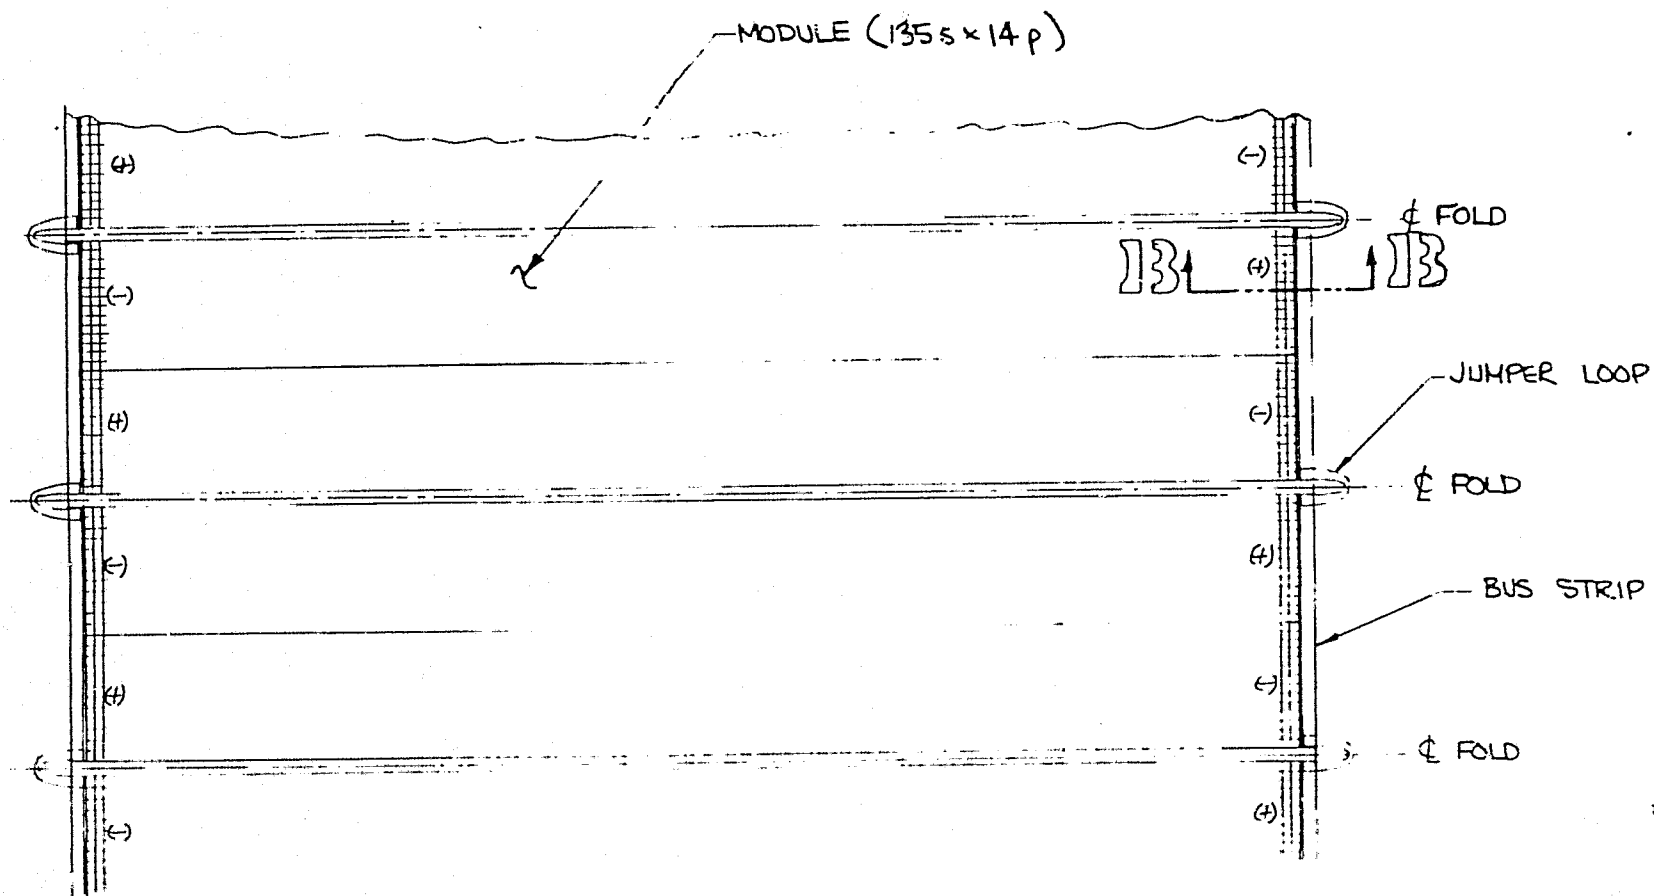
Detail of Module Arrangement on 110 W/kg Solar Cell Blankets
